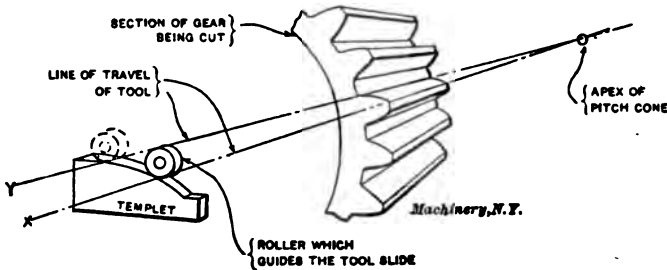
Illustrating the Templet Principle for Forming the Teeth of Bevel Gears
